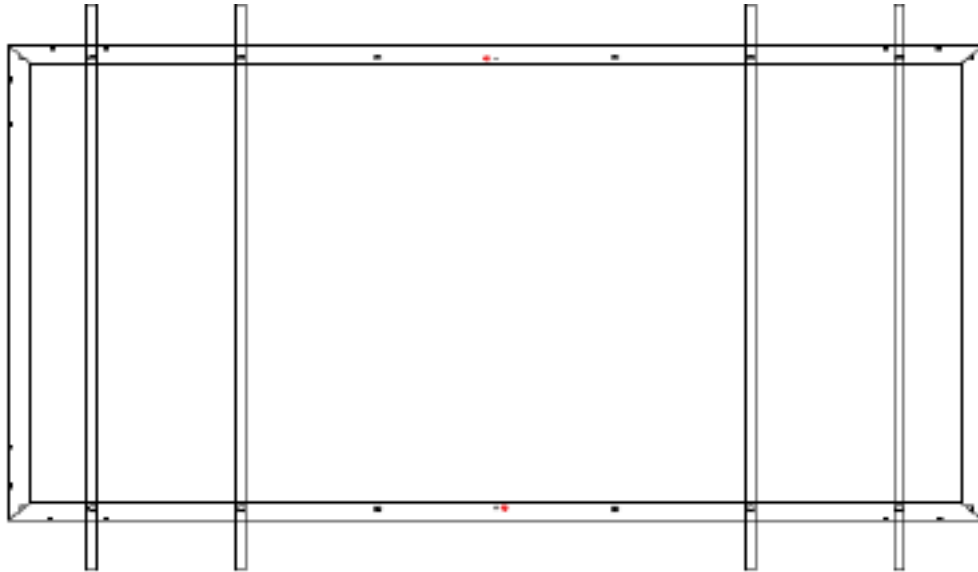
(8 mounting hole installation is compatible with frames featuring 8 mounting holes.)
